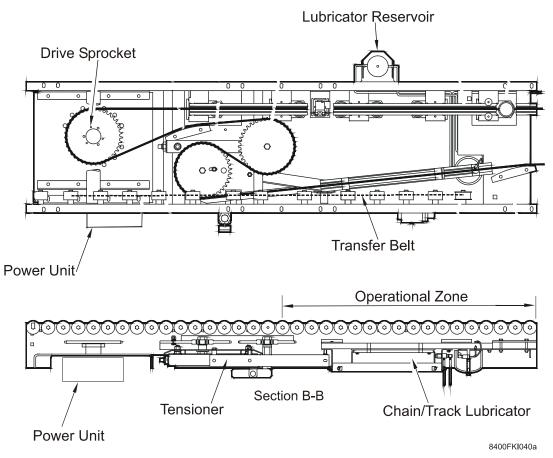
Accuglide Drive Section (Left-Hand Assembly Shown)
